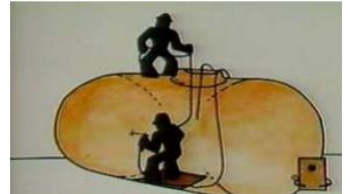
PROPER PROCEDURE FOR WELDING IN A TANK
